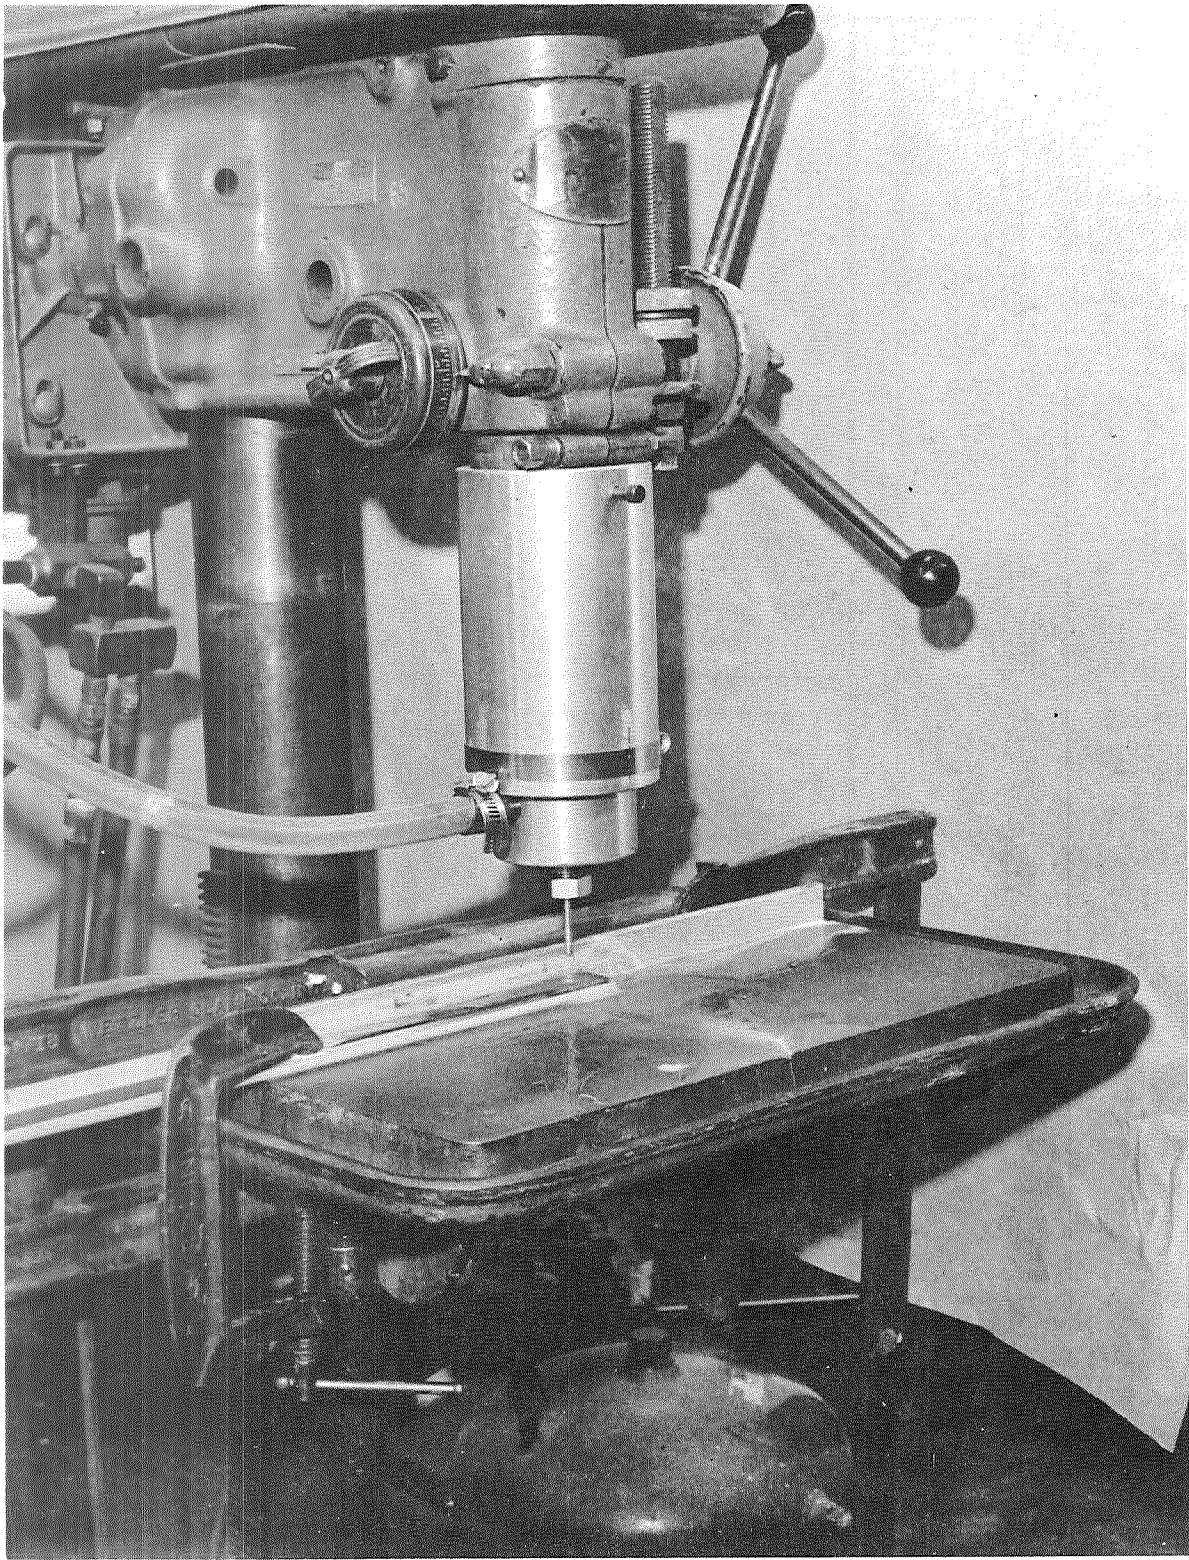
BORON/EPOXY DRILLING FIXTURE.
